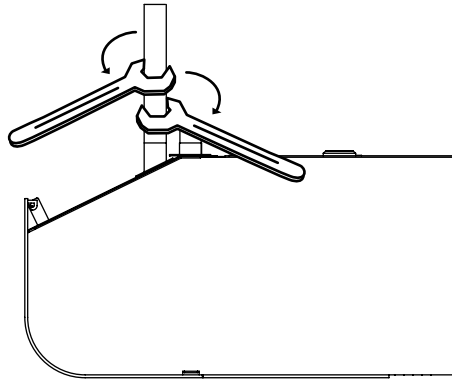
NOTE! Use a pipe wrench or a similar tool to grip the air curtain connections to prevent straining of the pipes.
